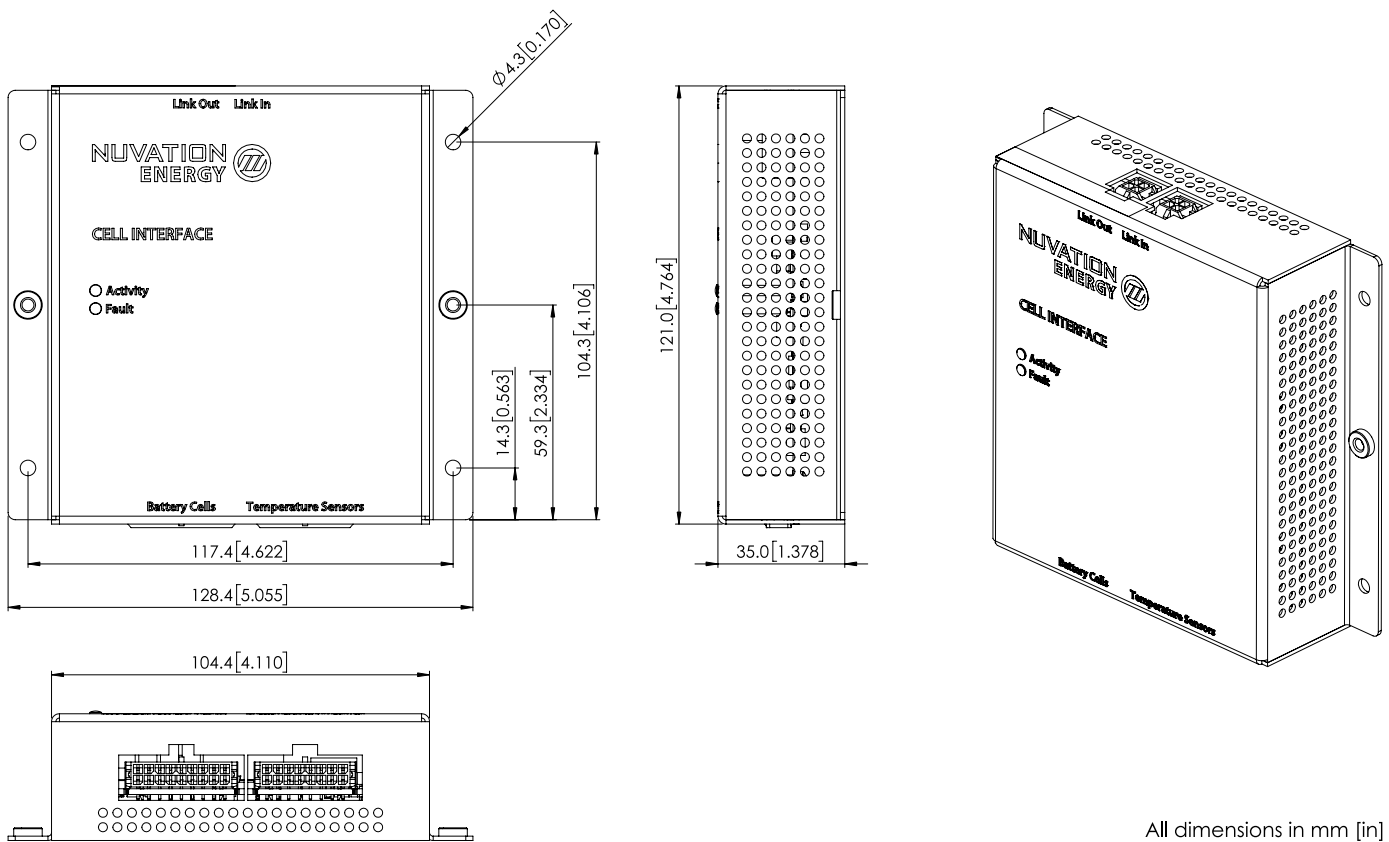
Mechanical Drawing of Cell Interface with Bulkhead Enclosure
